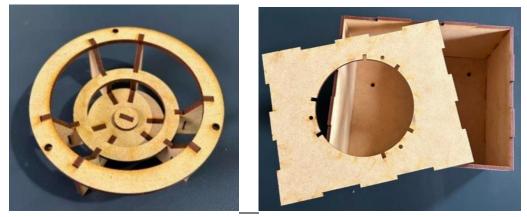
Assembled laser-cut parts: (left) speaker driver chassis, (right) speaker enclosure
